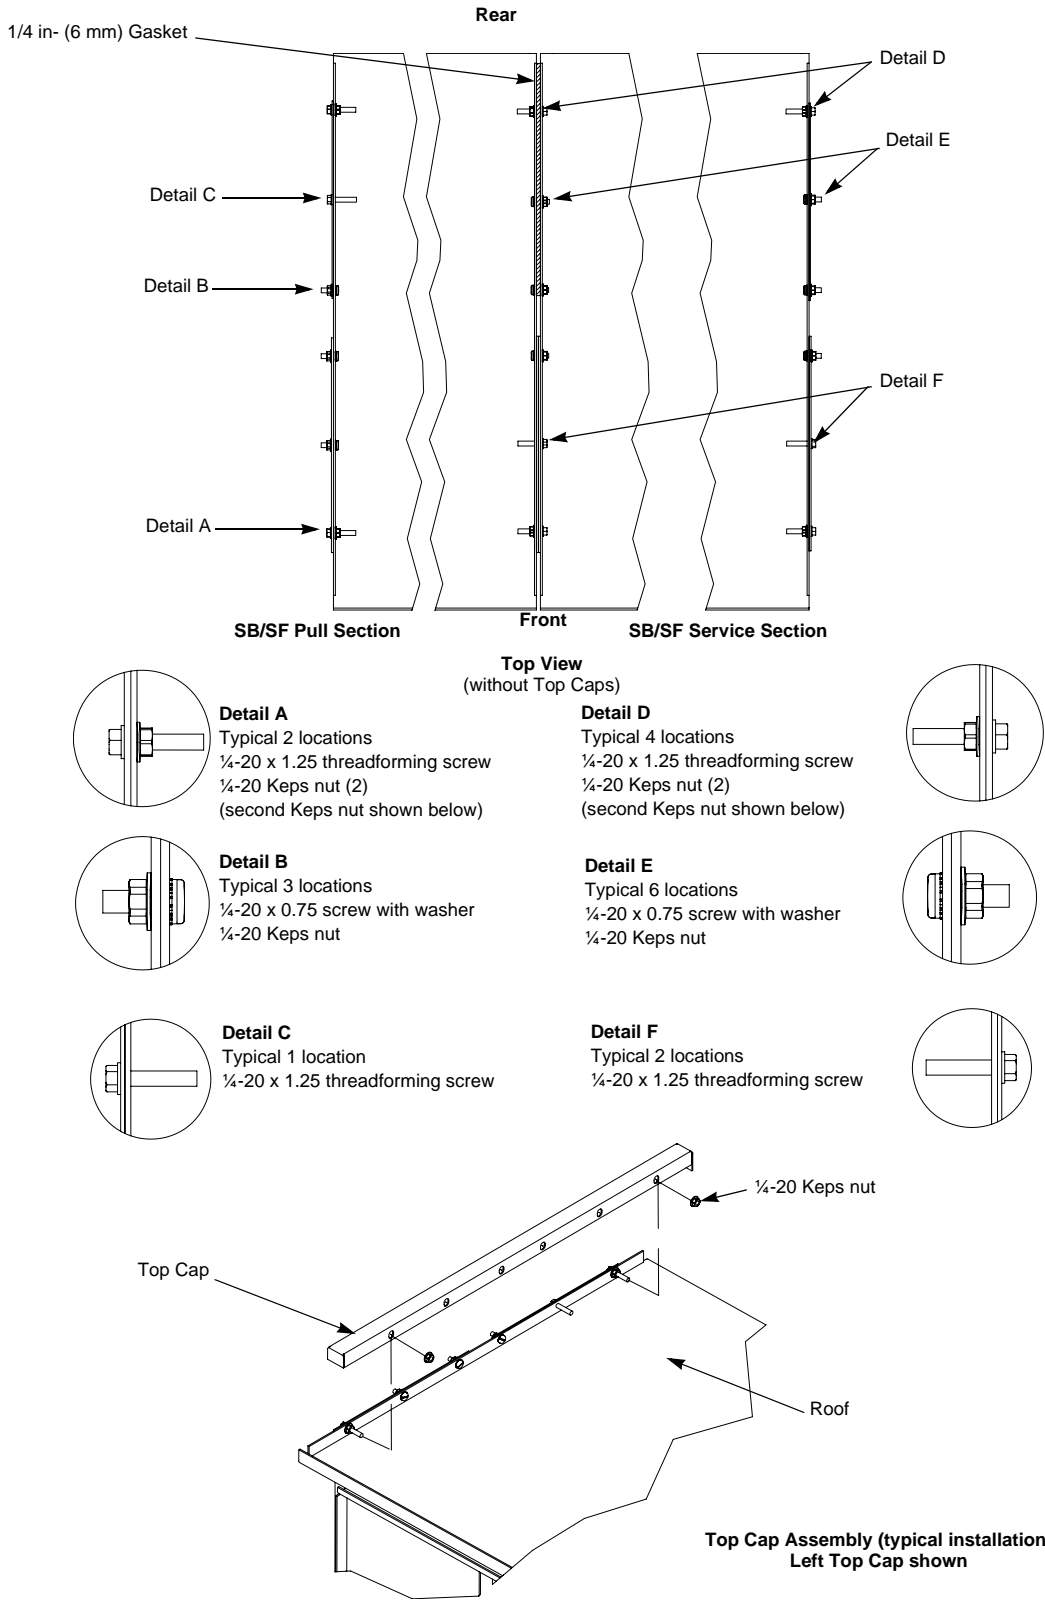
Outdoor Underground Pull Section NEMA 3R Top Cap Assembly
